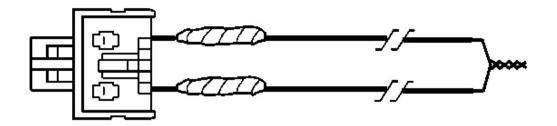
Taping Remaining Connector Wire Lead To Remaining Deployment Wire Courtesy of GENERAL MOTORS CORP.
